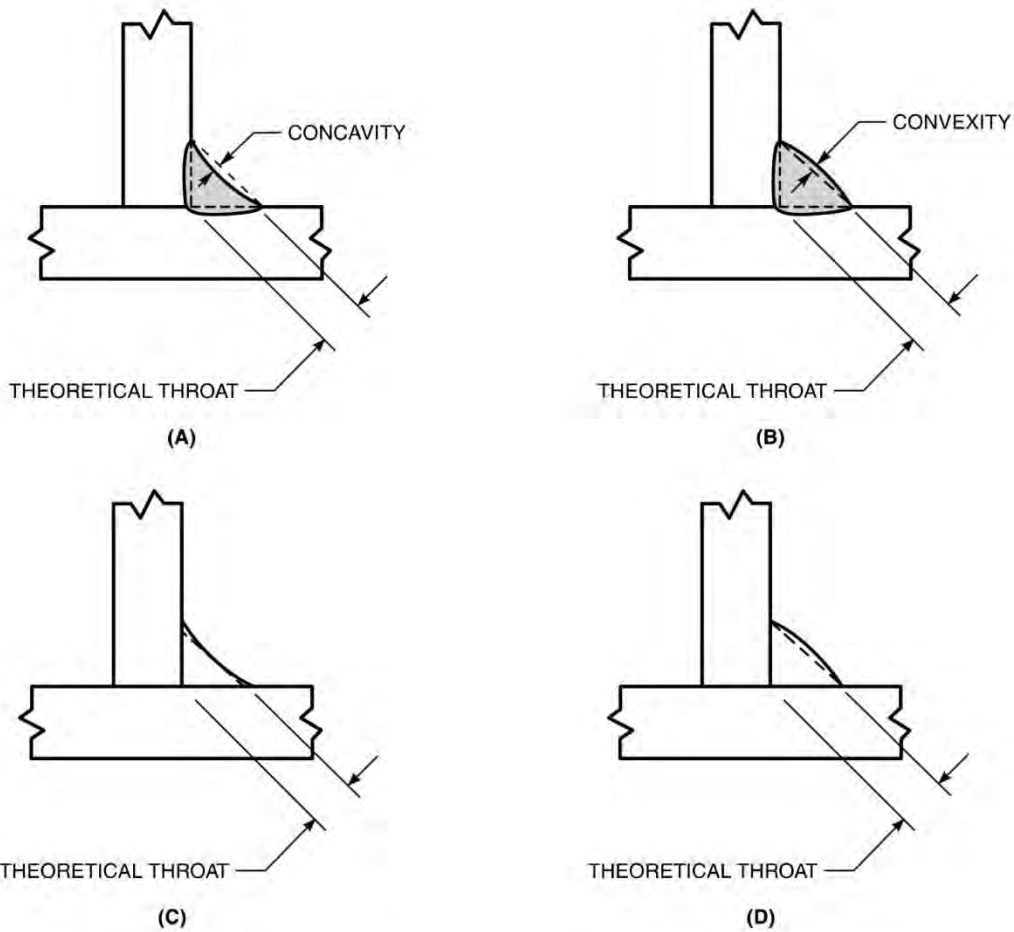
Illustration of Fillet Welds—Concavity and Convexity
